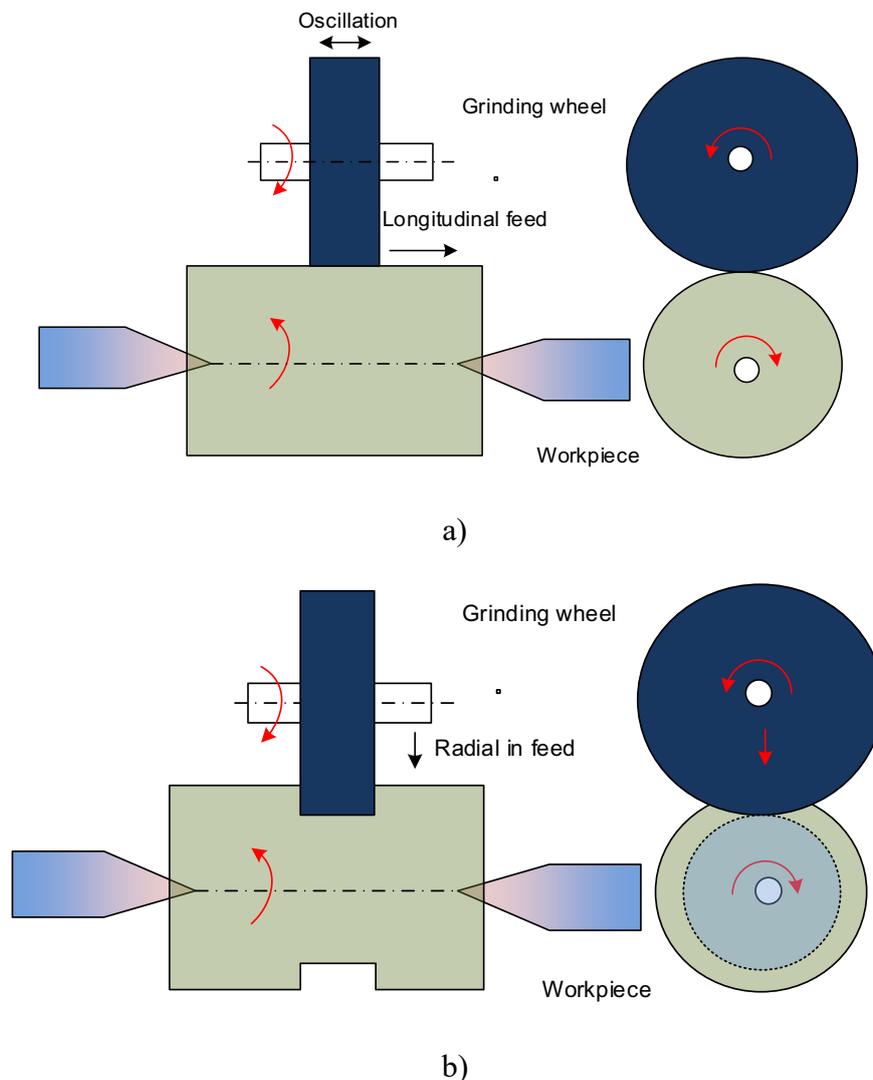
Schematic diagram showing centre type a) external cylindrical grinding and b) plunge-cut external cylindrical grinding.
